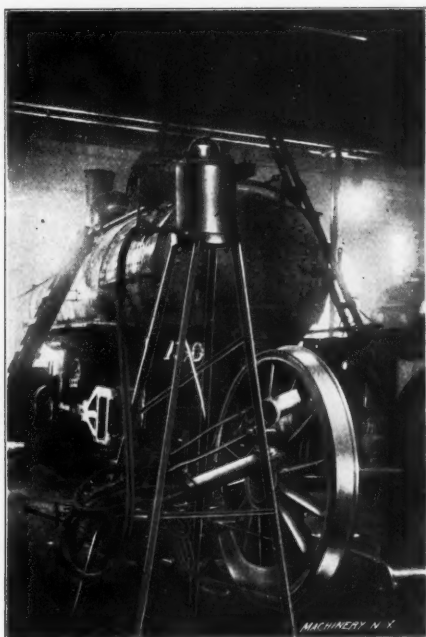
Crude Oil Burner used for Frame Welding
